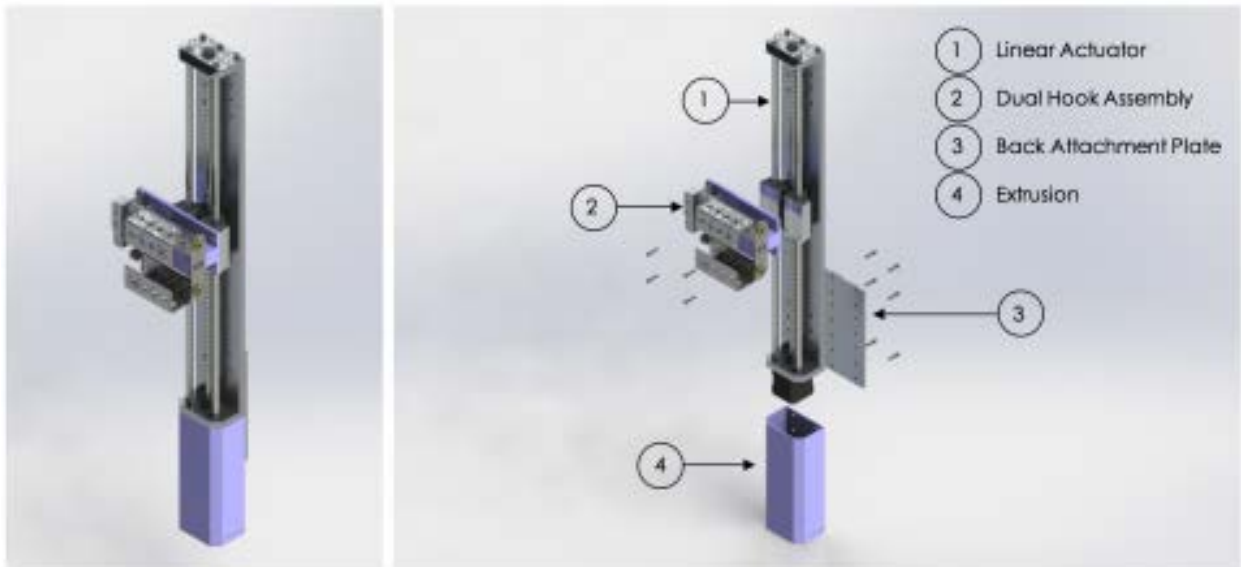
(Left) isometric view and (right) exploded view of the lifting and climbing mechanism
